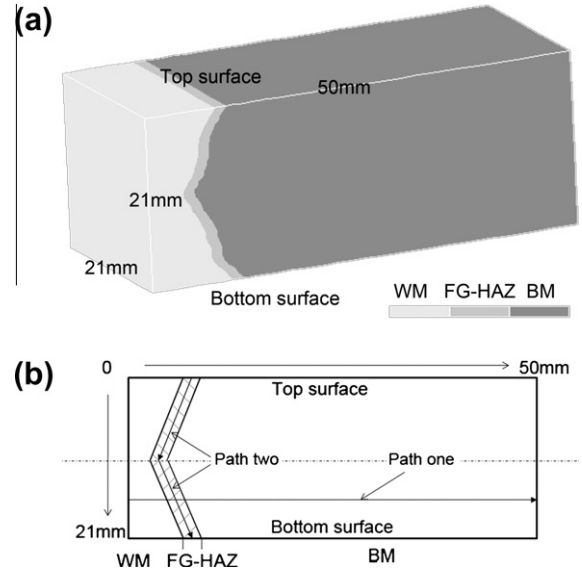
Three-material and three-dimensional finite element model of thick plate welded joint specimen, and diagram of Path one and Path two in the central cross section.
